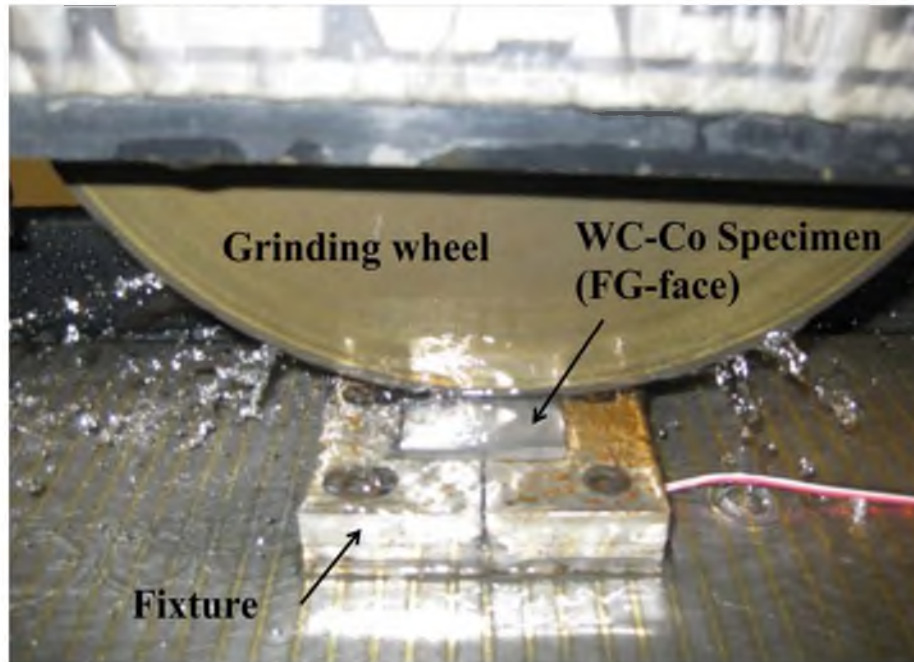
Photograph of experimental setup for layer removal, showing strain gauged sample in fixture for the flat WC-Co specimens.
